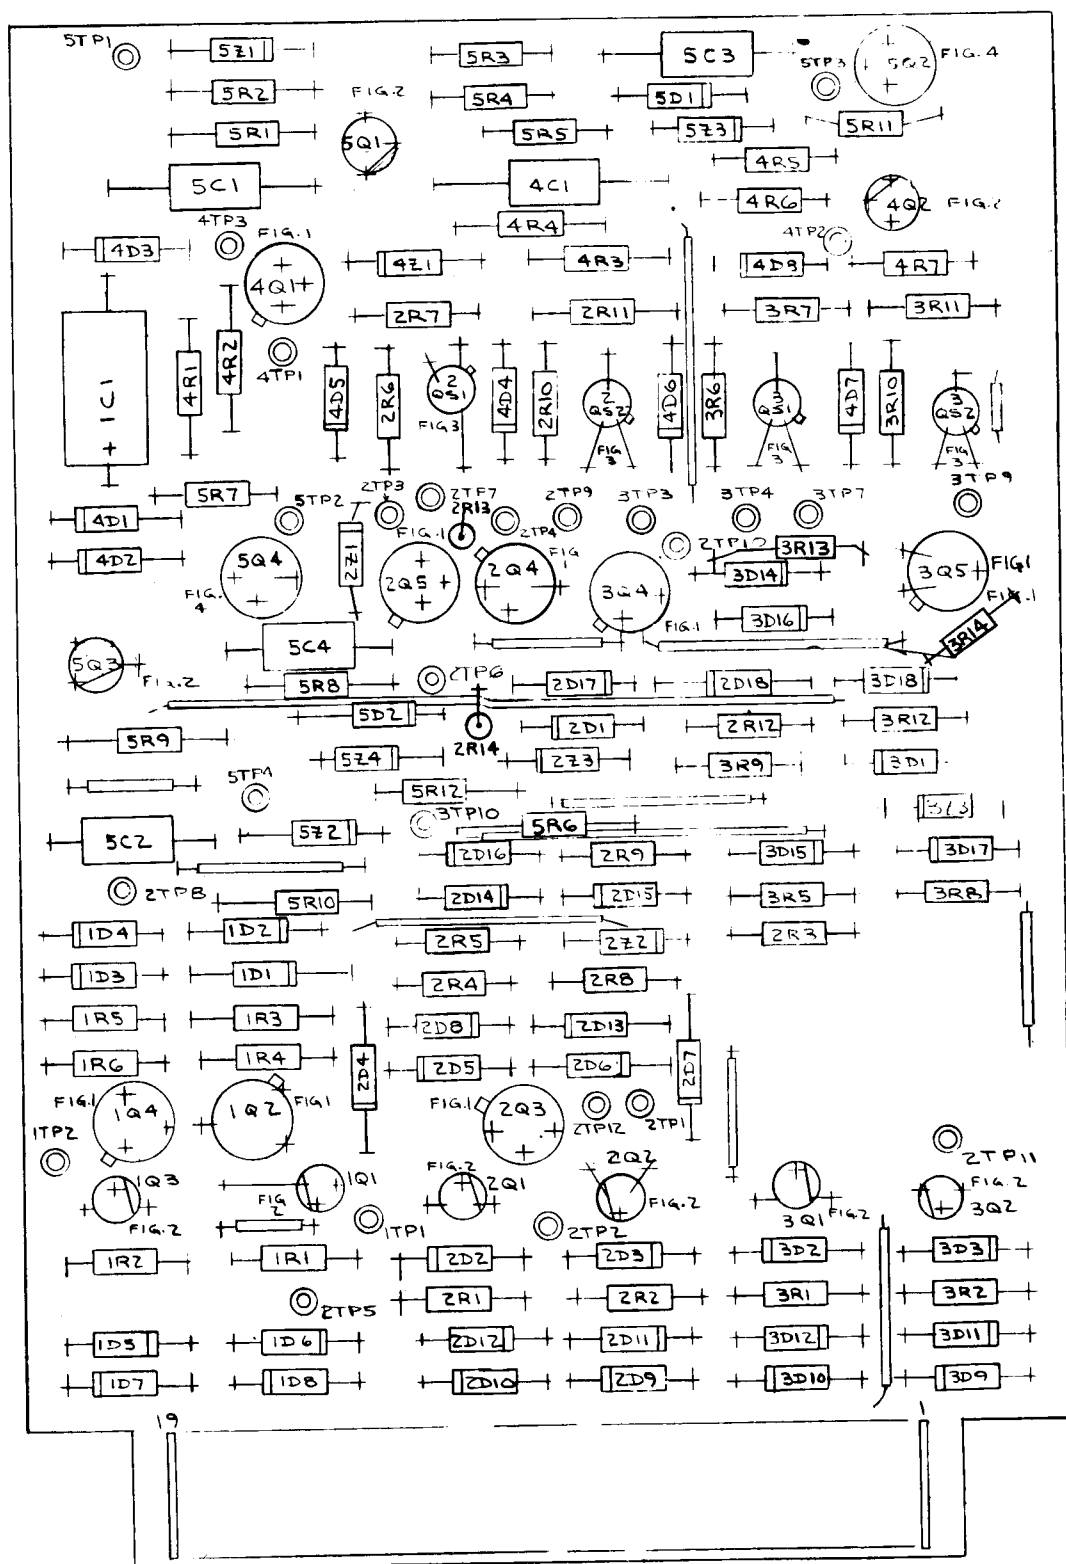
Printed Circuit Board Assembly for Type SP-1 Relay with Single Output.
